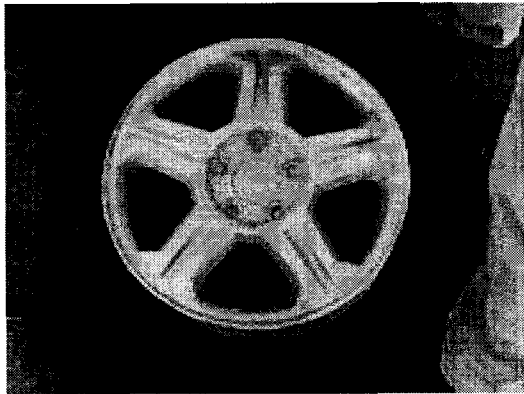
Photograph of composite wheel manufactured by RTM process.
